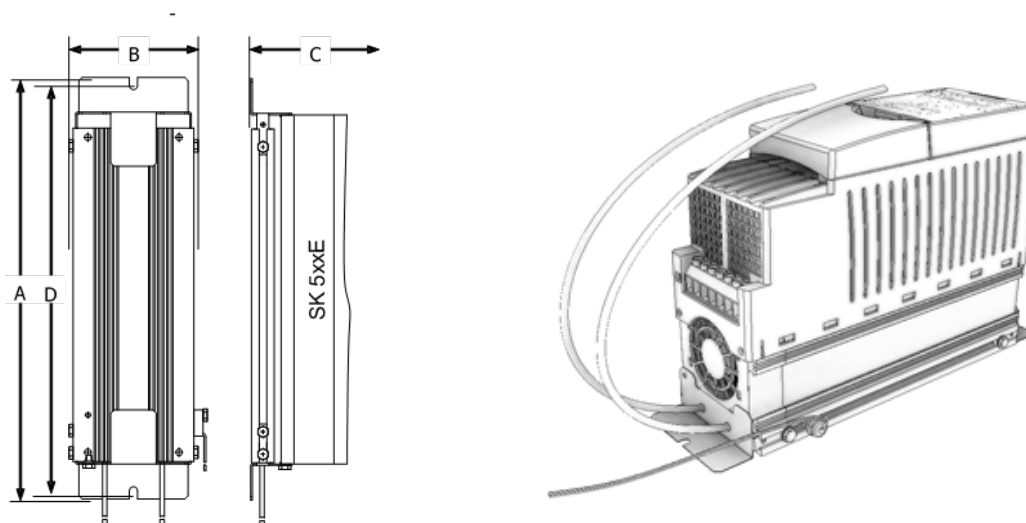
Dimensioning and assembly of SK BR4-... on SK 5xxE
